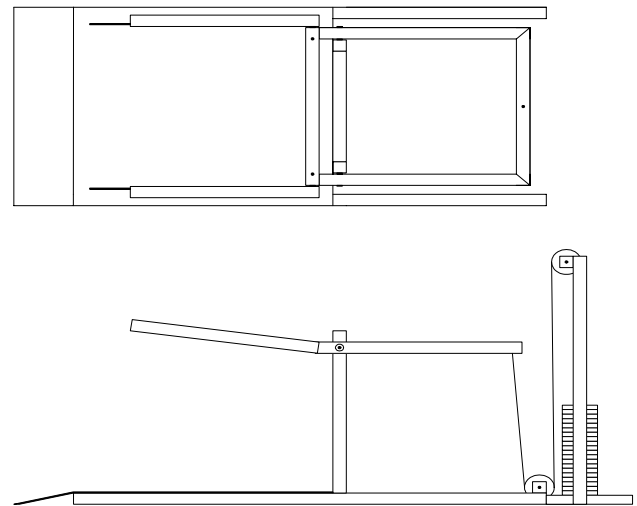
Top View (Top) and Side View (Bottom) of Rickshaw Machine.
